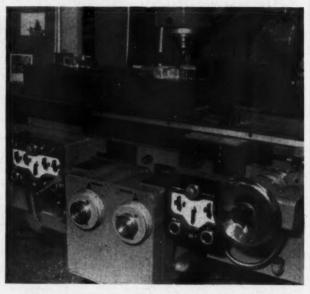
Close-up view of the stop carrier and micro-switch unit for controlling table movements on the Fritz Werner machine
